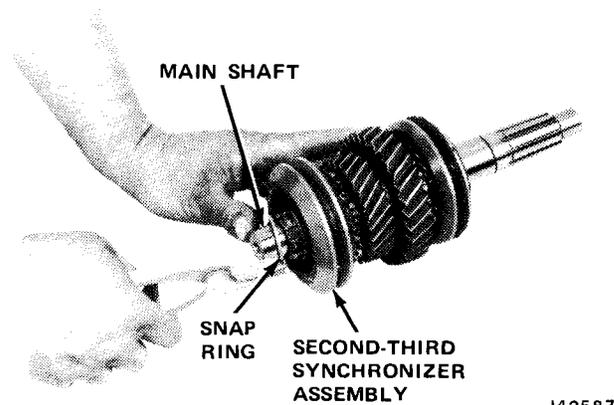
Second-Third Clutch Hub Snap Ring Removal—Installation
